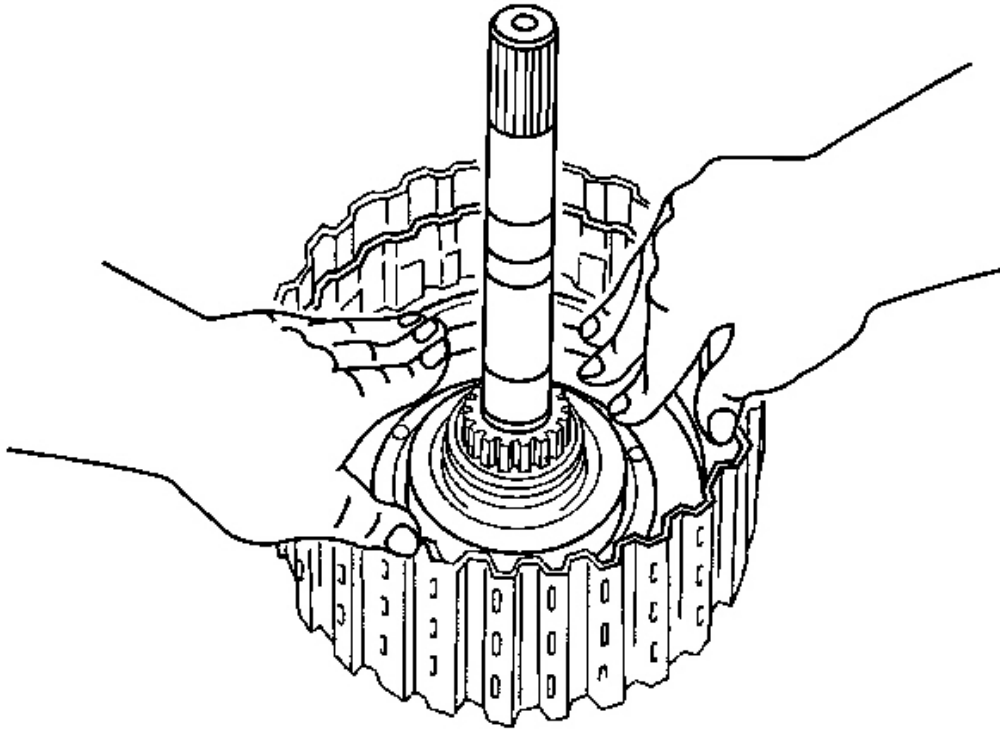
Forward Clutch Drum, Lip Seal & ATF
